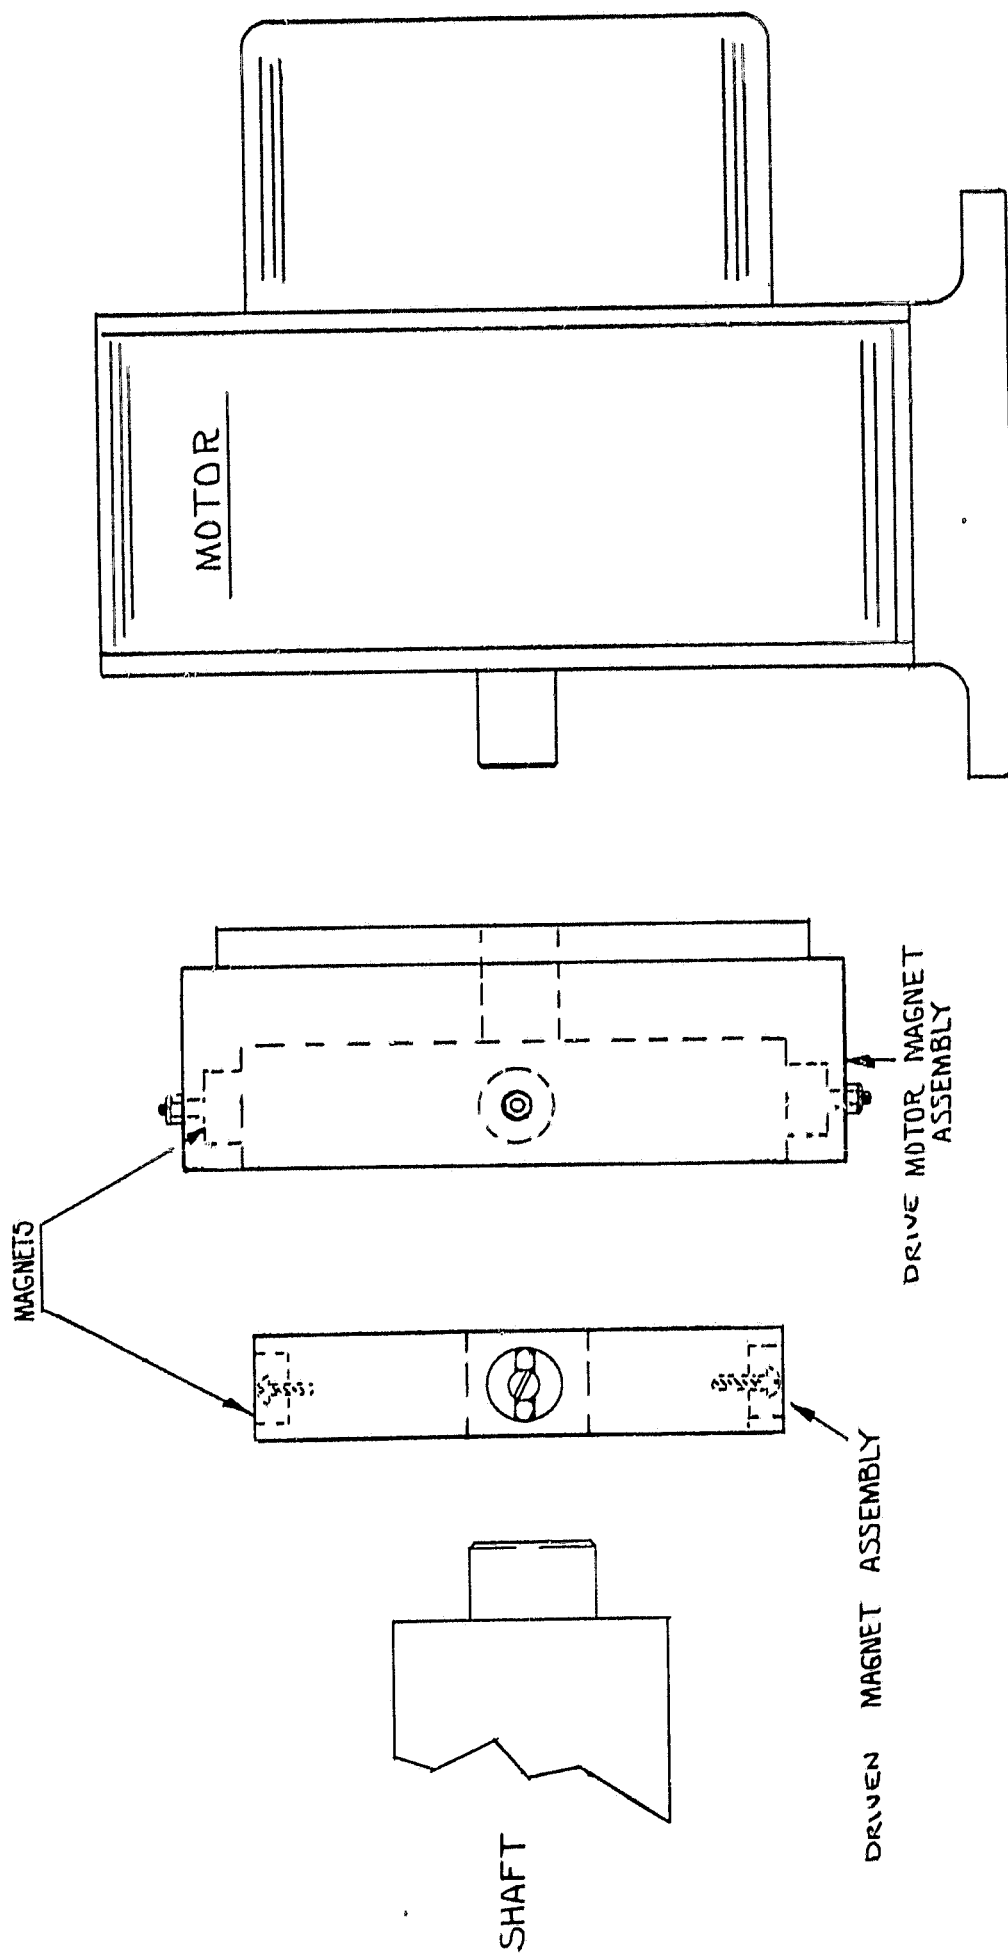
MOTOR AND MAGNET ASSEMBLIES
